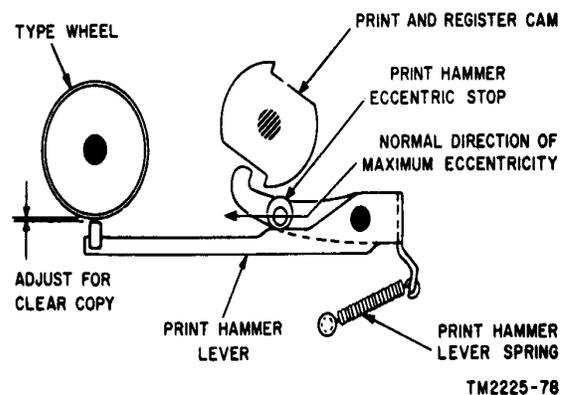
Print hammer lever alignment in operated position (TT-76/GGC).
